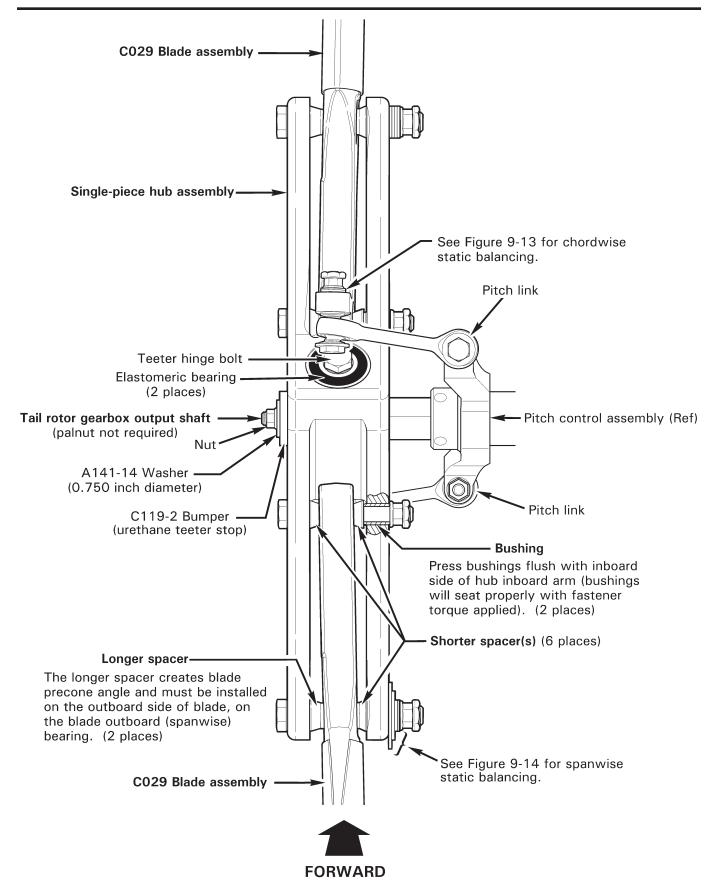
SINGLE-PIECE HUB TAIL ROTOR ASSEMBLY INSTALLATION
